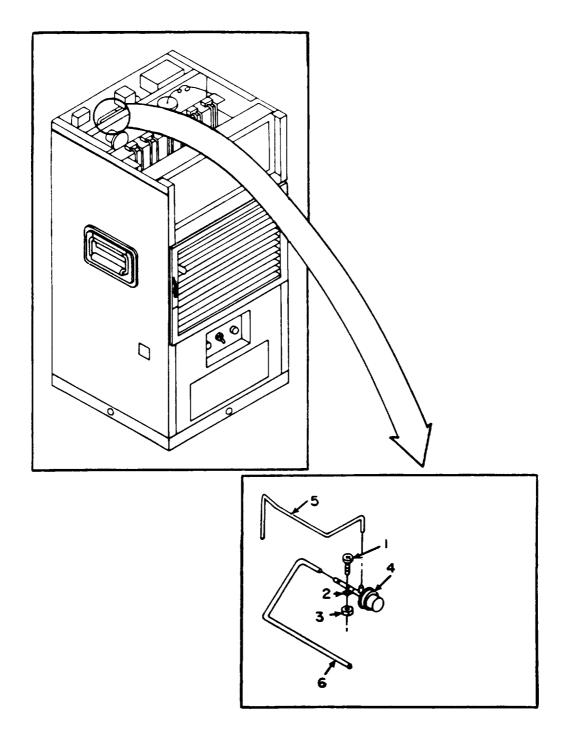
Pressure Regulator Valve and Attaching Hardware.
